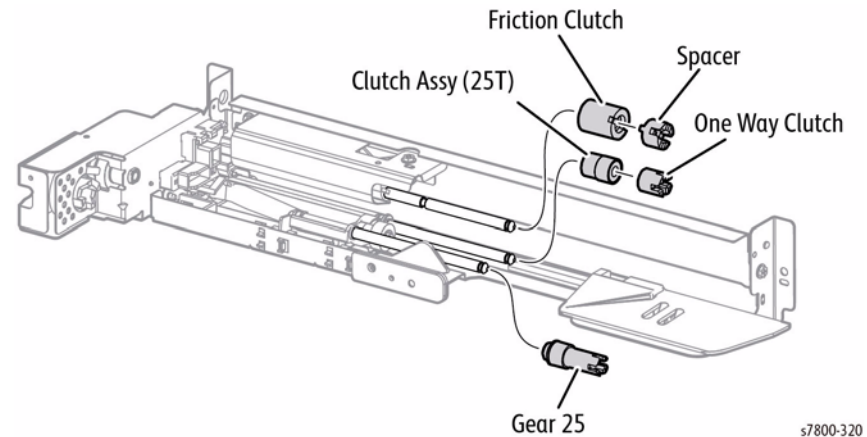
Removing the Tray 3/ 4/ 5 Clutch Assembly/ One-way Clutch/ Friction Clutch
